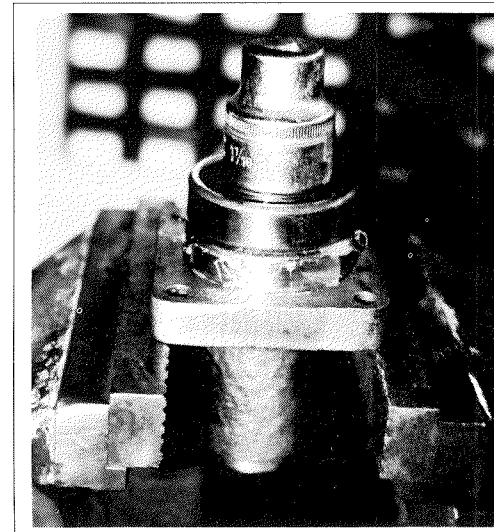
Using the old bearing and a socket as shown drive the new roller bearing squarely into the housing.
